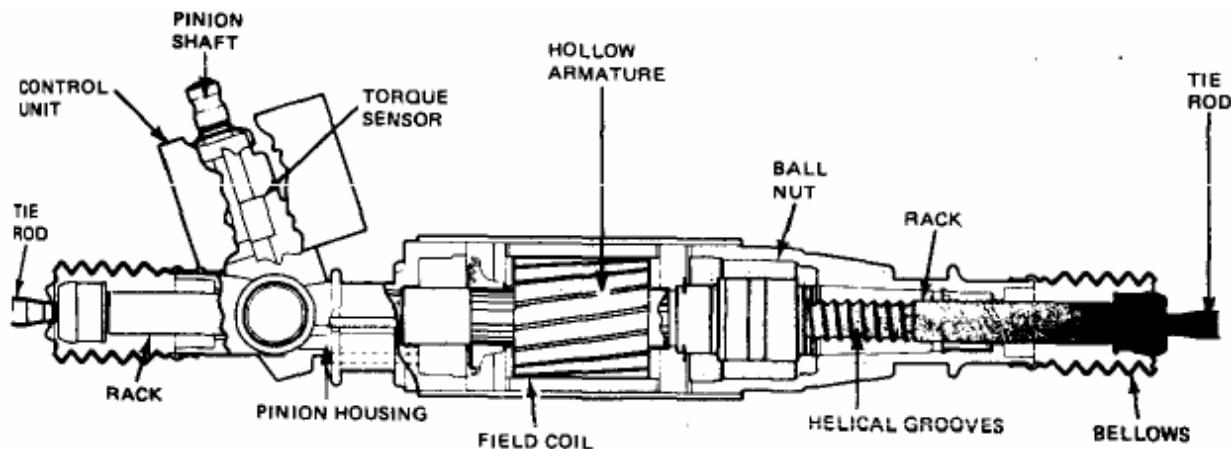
Electronic Rack-and-Pinion Power Steering
